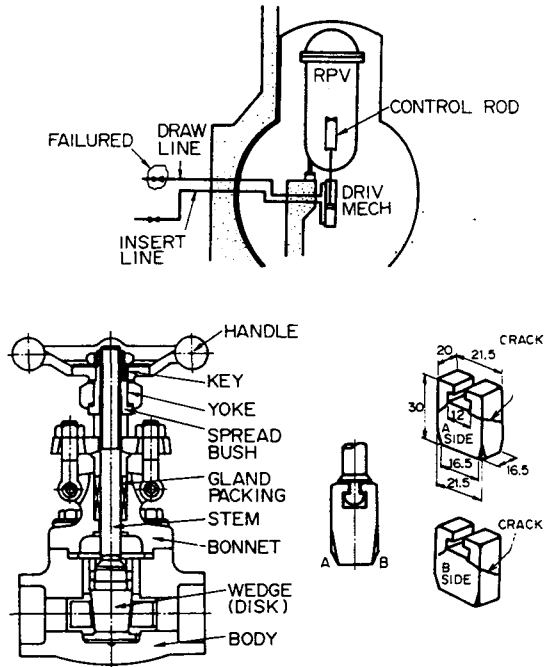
Fatigue crack in yoke of valve disk (CRD hydraulic system).
